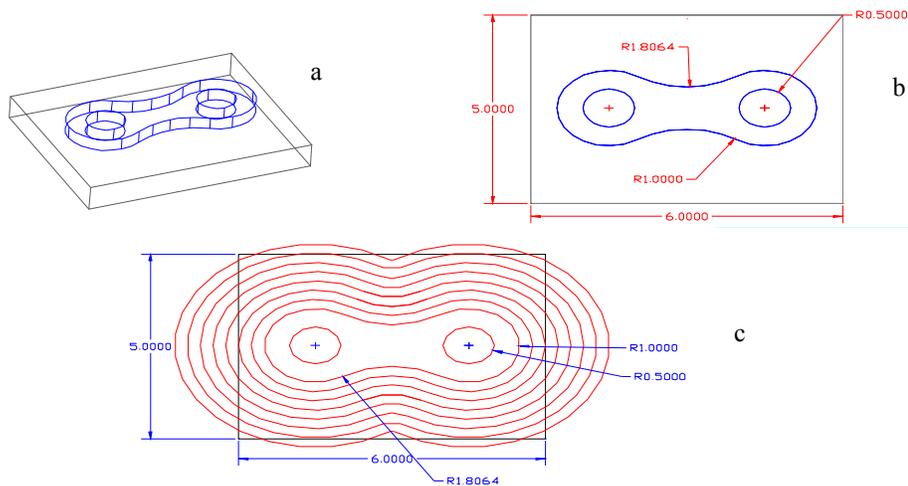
a. A solid model of the part, b. a working drawing c. tool path
